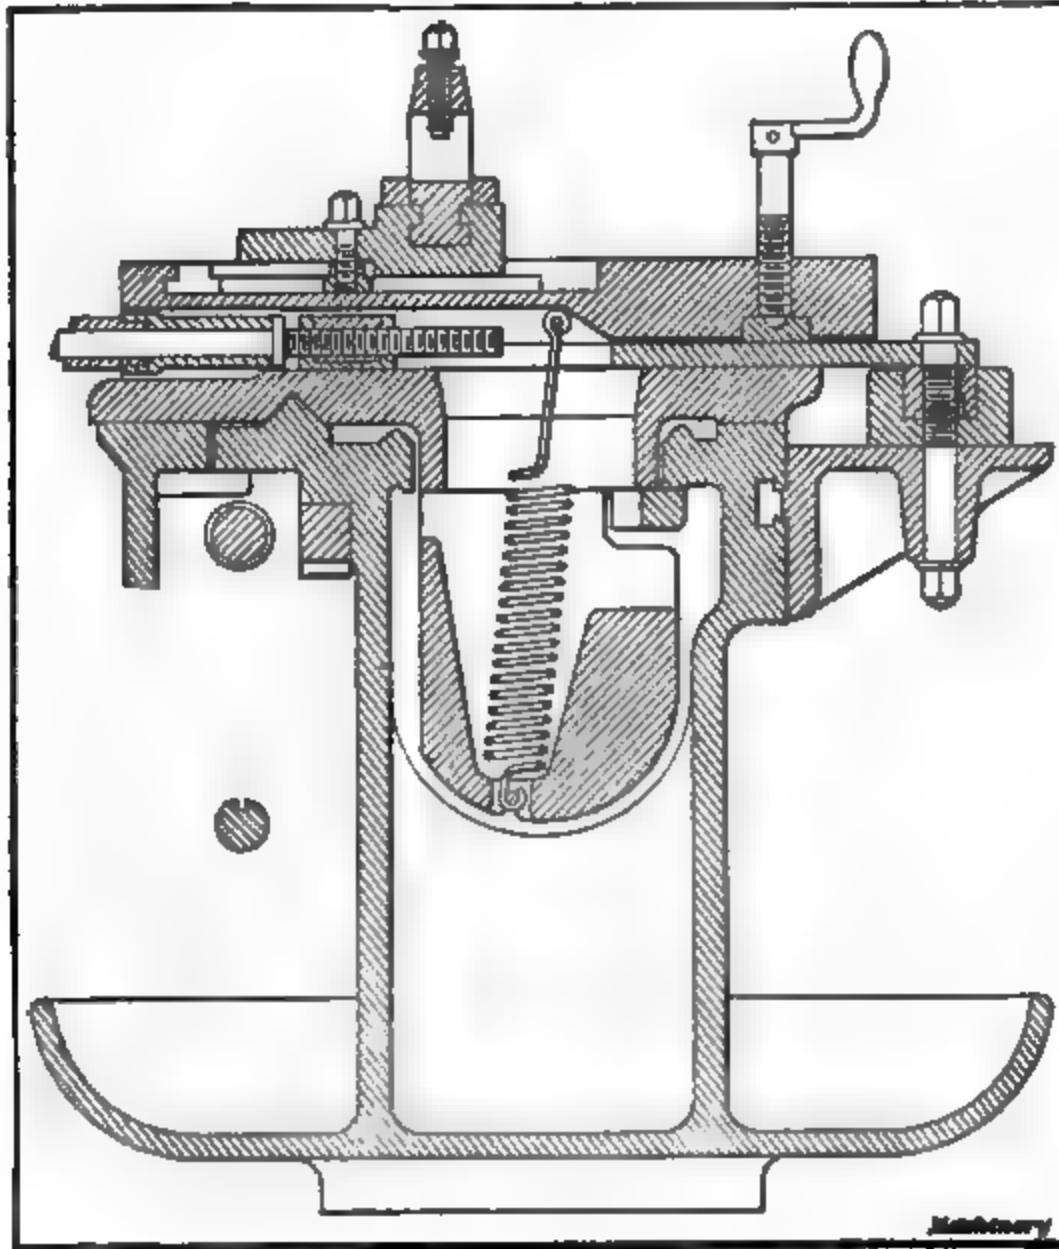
Bed of Tool-room Lathe built by the Pratt & Whitney Co., Hartford, Conn.
